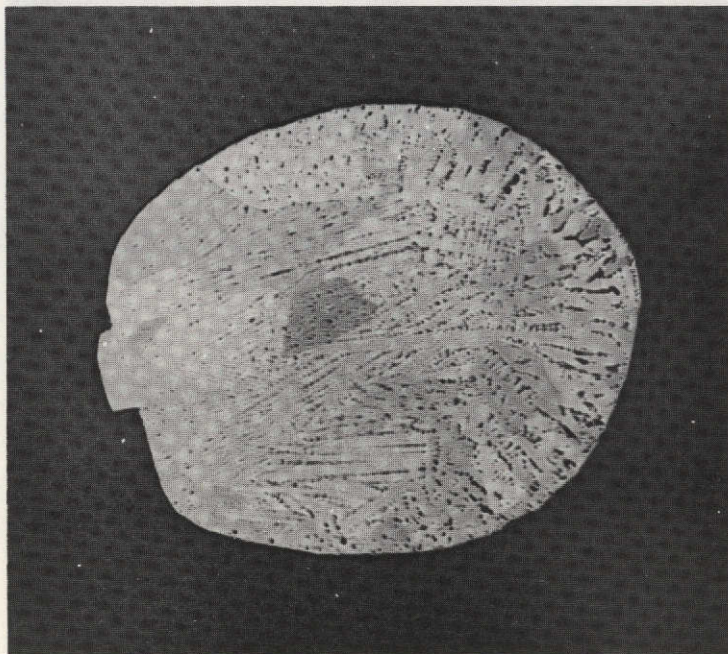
Etched Cross Section of Specimen SL-2.6
